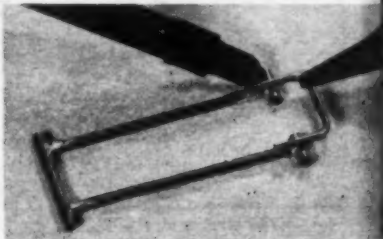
In this photo the front carrier, after having been bent to the shape shown, is held in needle-nose pliers while soldering joints.
